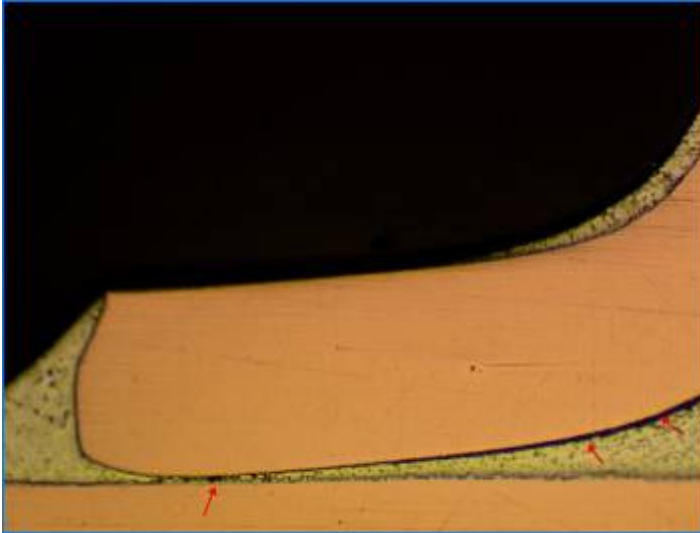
cross section, SN68, U31, left lead solder partial crack, 200xa
